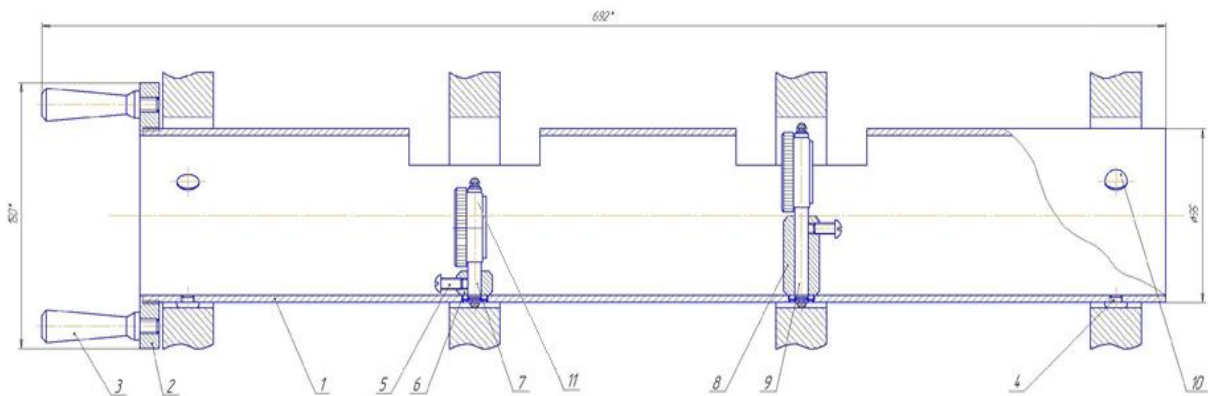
PKV-1 for controlling the coaxiality of the main bearing holes relative to the end ones consisting of the following components: 1 – housing; 2 – flange; 3 – handle; 4 – pressure-bearing support; 5 – locking screw; 6 – stand; 7 – indicator head foot; 8 – long stand; 9 – long indicator head foot; 10 – support
